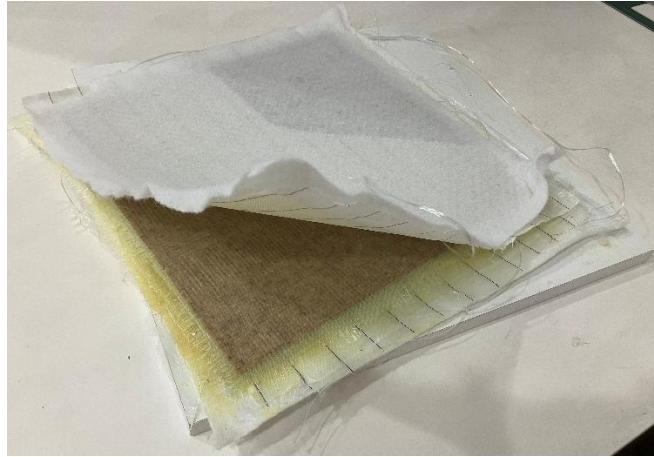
Experimental Sandwich Composite after mold removal.
